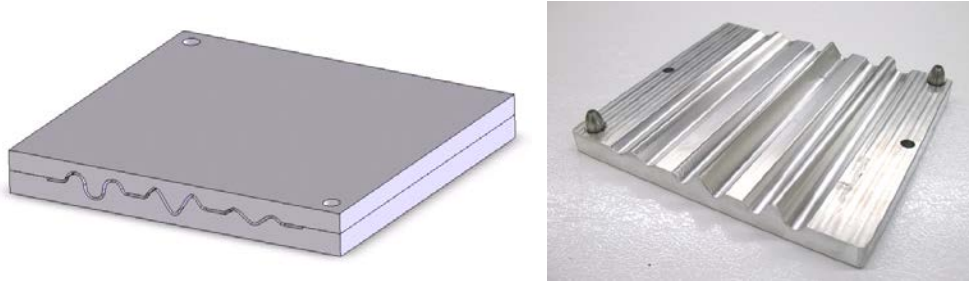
Matched Aluminum Mold for Corrugated Test Specimen
